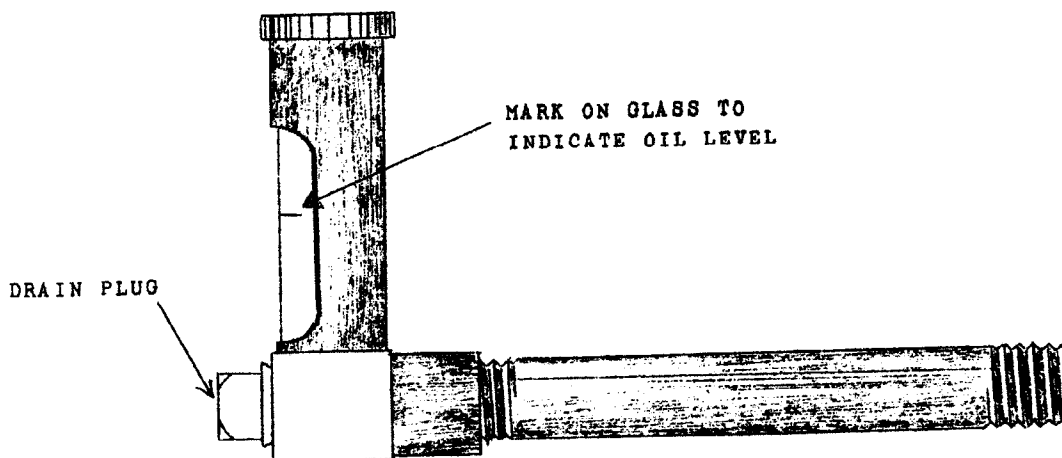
Stock No. 26602 Visual Oil Gauge for
